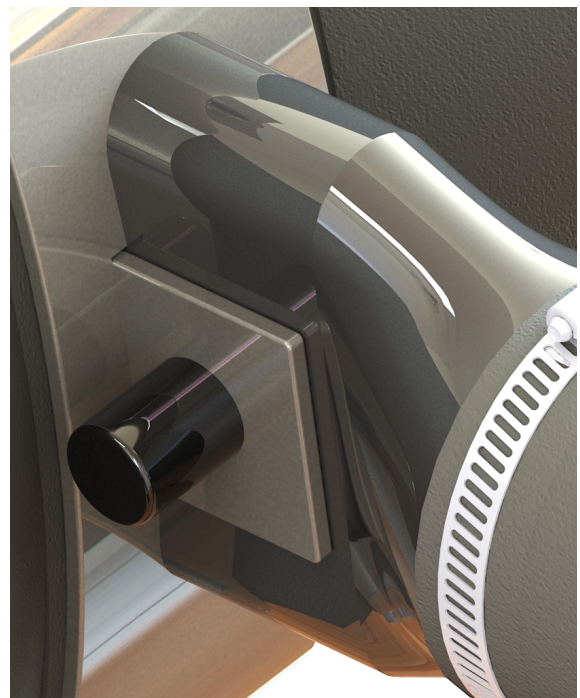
Showing the assembled side nozzle and pressure valve to the bracket.
